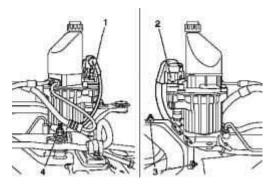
Removing the electrohydraulic module: 1, 2 - connectors wiring harnesses, 3, 4 - nuts
